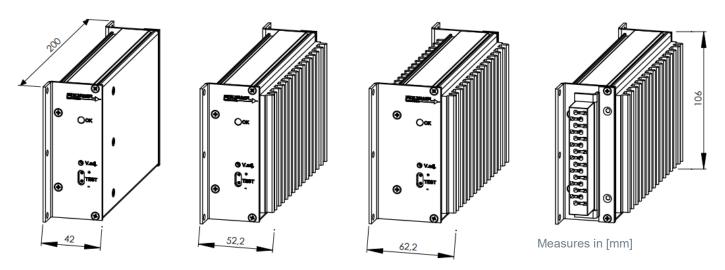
Front and connector view of N-H15 Mechanics, includes connector holder and H15-CC female connector.
